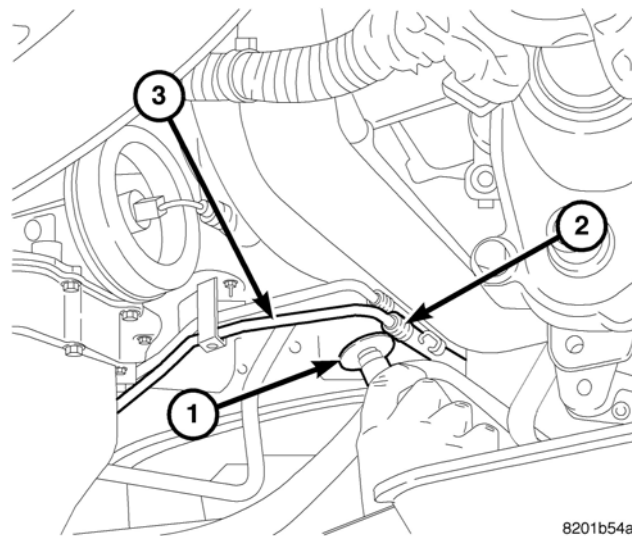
CUTTING TRANSMISSION COOLER RETURN LINE CLAMP
